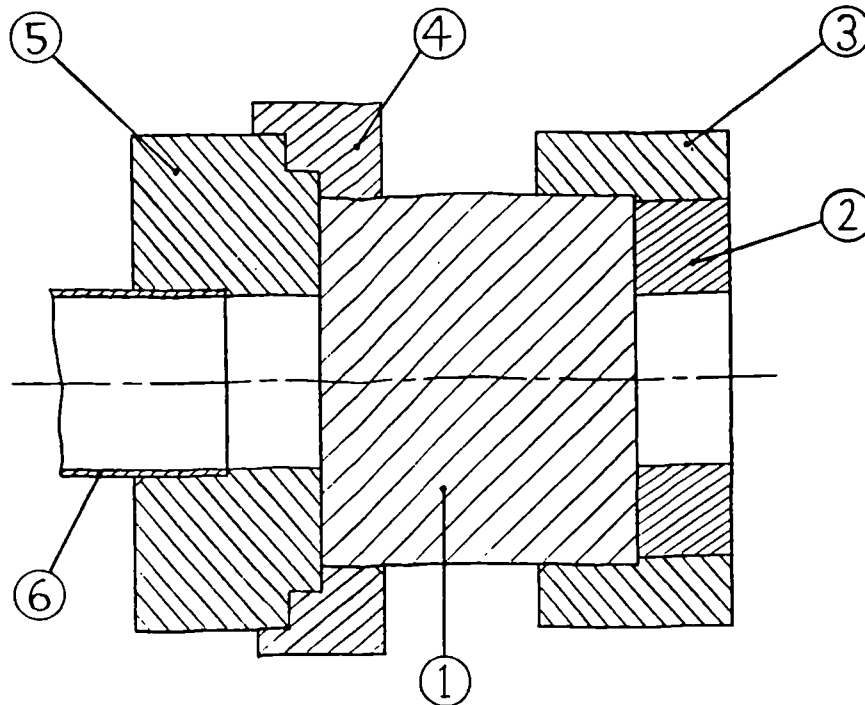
Sectioned drawing of modified catalyst assembly for resistance tests; (1) monolith, (2) outlet sleeve insert, (3) outlet sleeve, (4) outlet section of 180° expansion, (5) inlet section of 180° expansion and (6) inlet pipe
